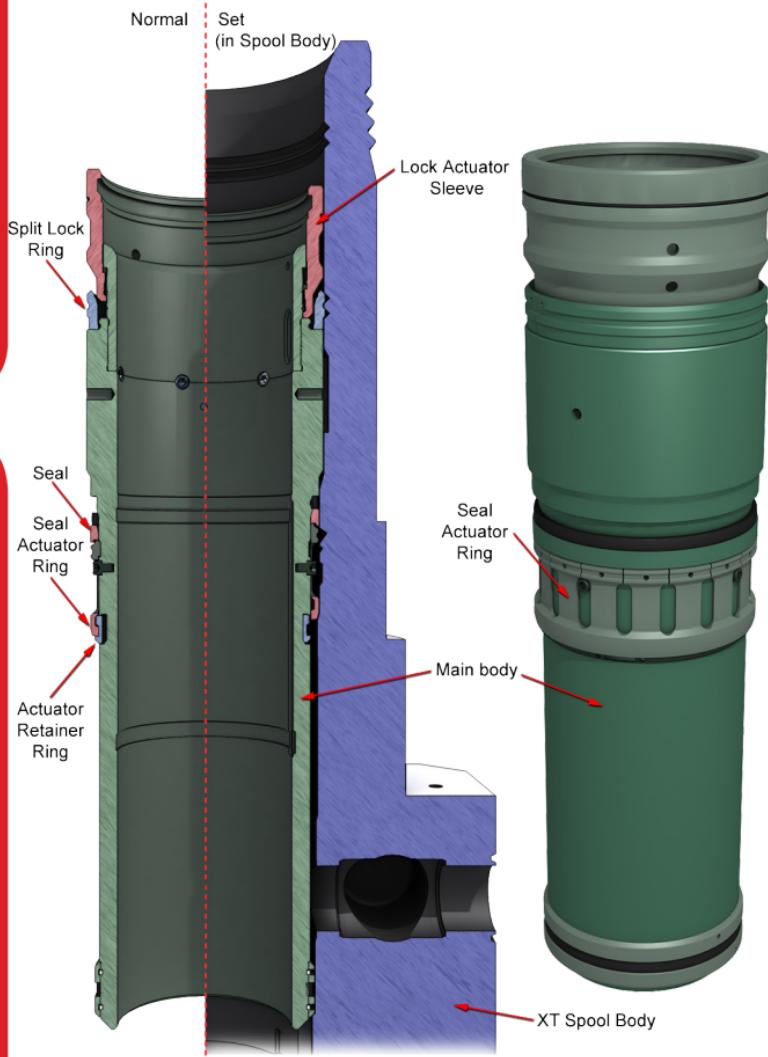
HS0000-20 / AO32-2-103-000-LO-09-DZ-044
